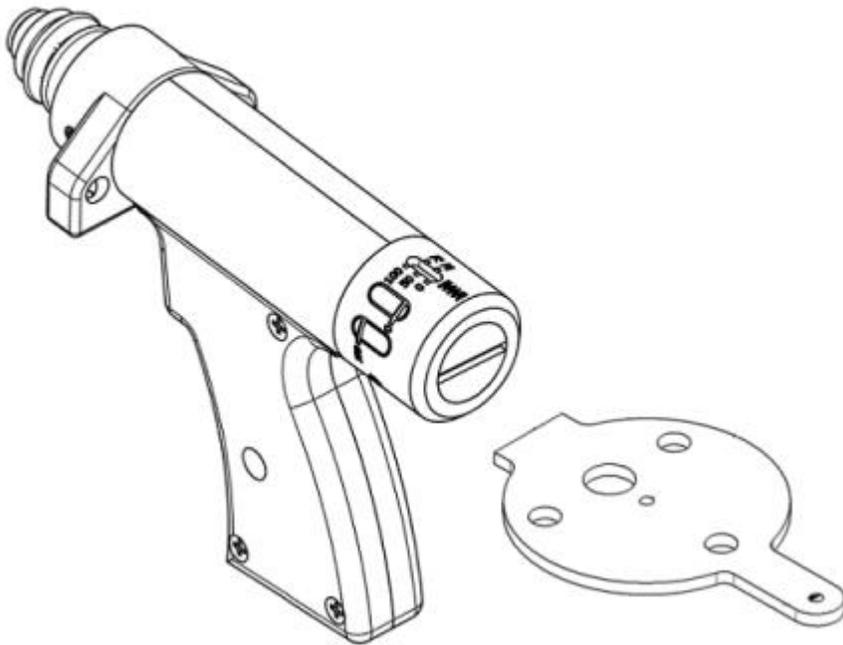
Contact Gun with NCD+ Set-Up Tool #525-001-200
